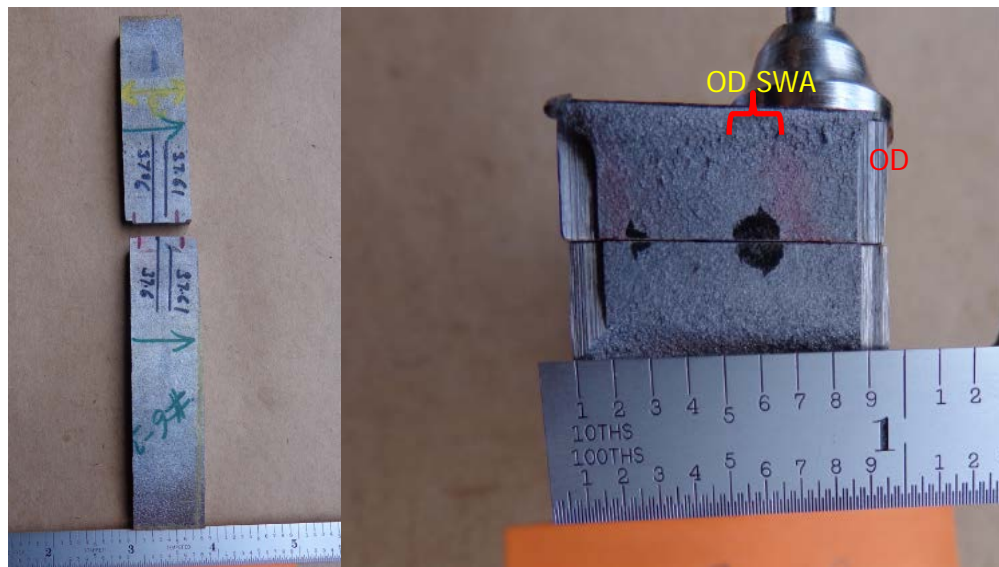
SWA #6-2, Break location and fracture surface
